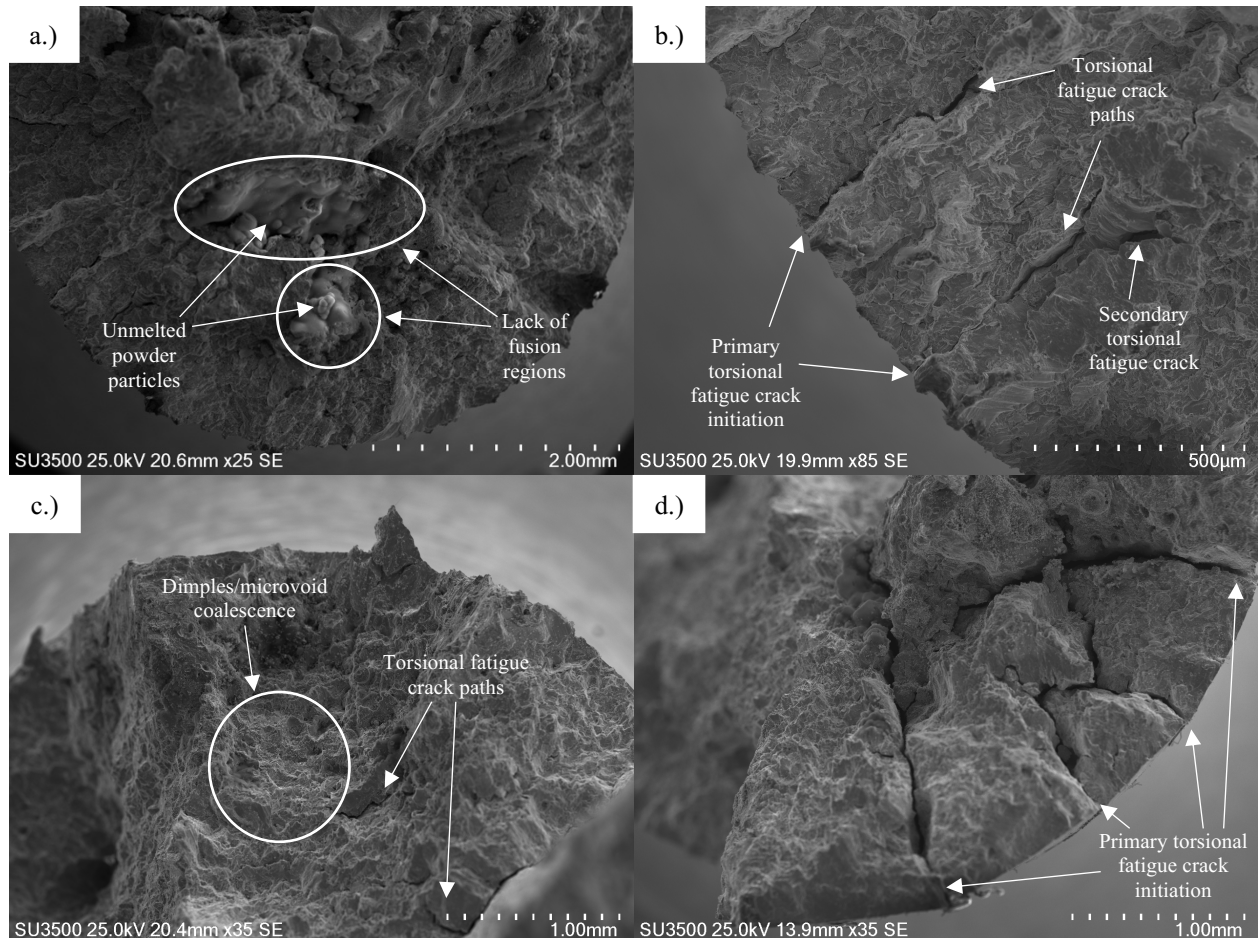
SEM images showing torsional fatigue fracture response of vertically built machined and heat-treated DMLS IN718 at 650°C.
